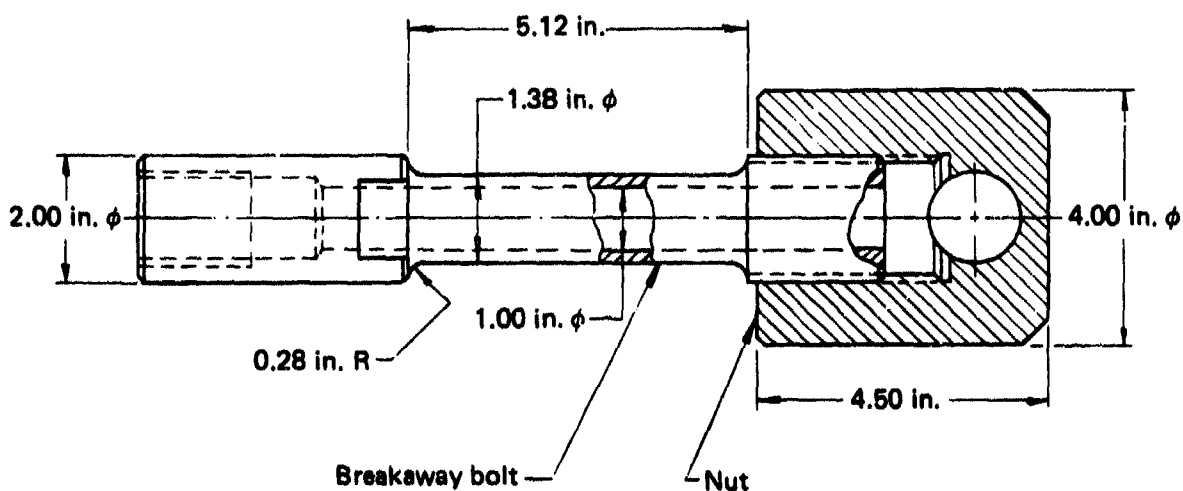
Breakaway bolt used to hold the front plates onto the bullnose.
